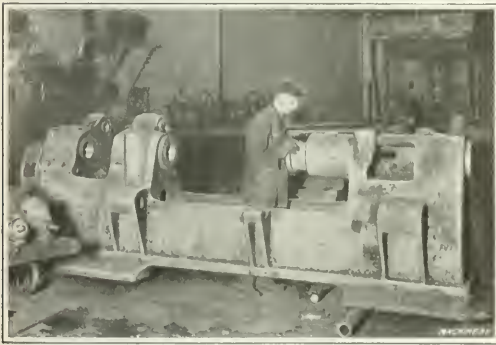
Bed Casting with All Spindle and Shaft Bearings in Place. Note Track Load of Parts at Left-hand Side of Machine
